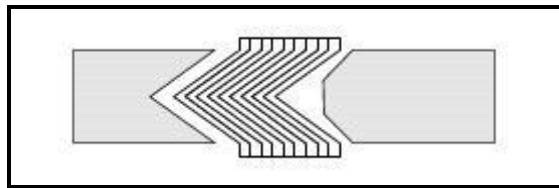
Cross section of spiral wound gasket; V-shaped profile
